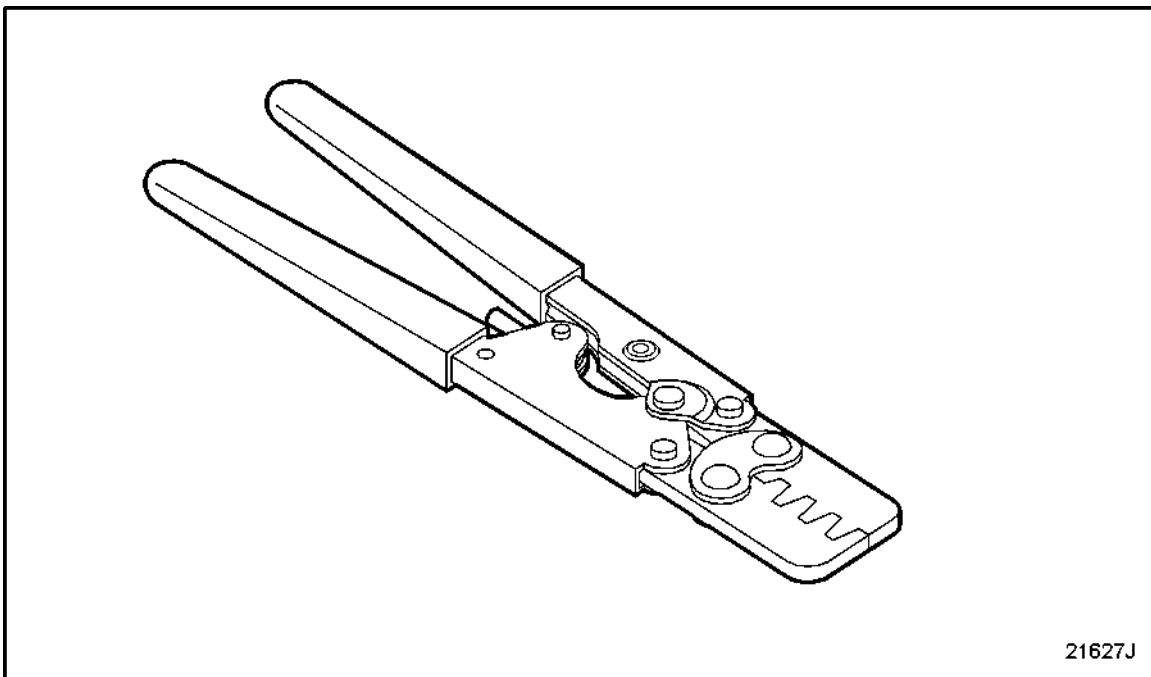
Terminal Crimper (Metri-Pack),J 38125-6
